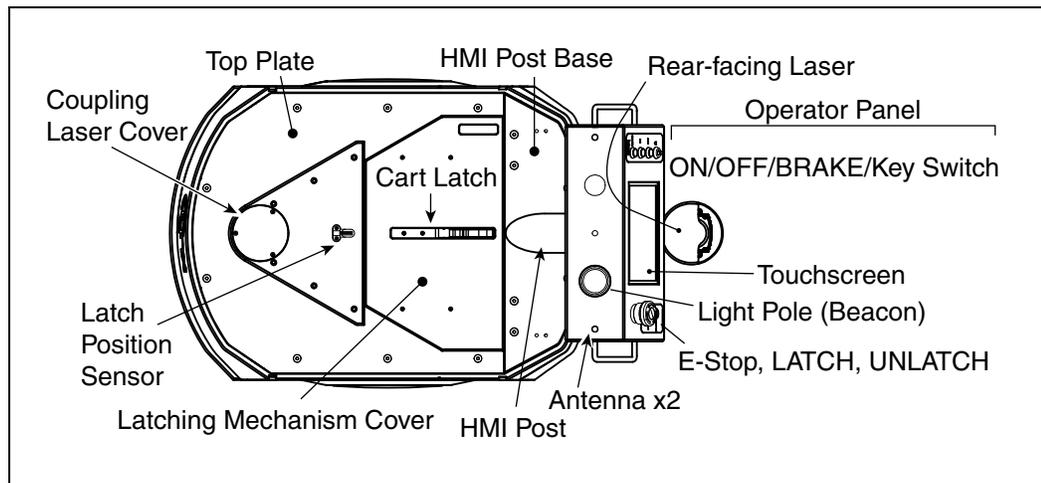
Top View of an LD Platform Cart Transporter, Side Laser Support Tubes Removed
